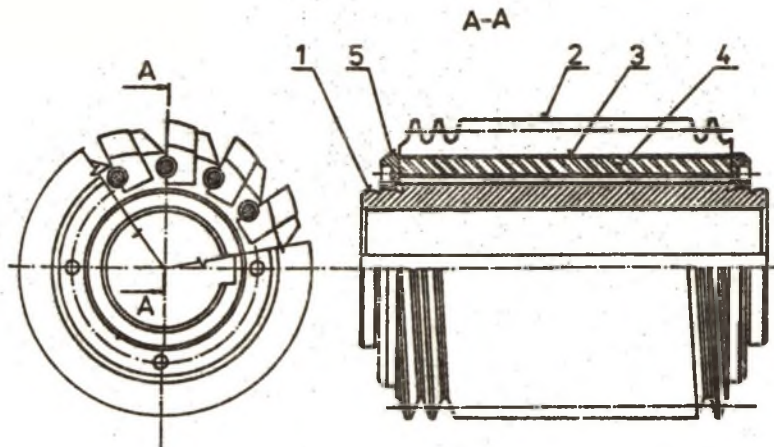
Hobbing cutter with inserted segments, $m = 2\text{mm}$,
